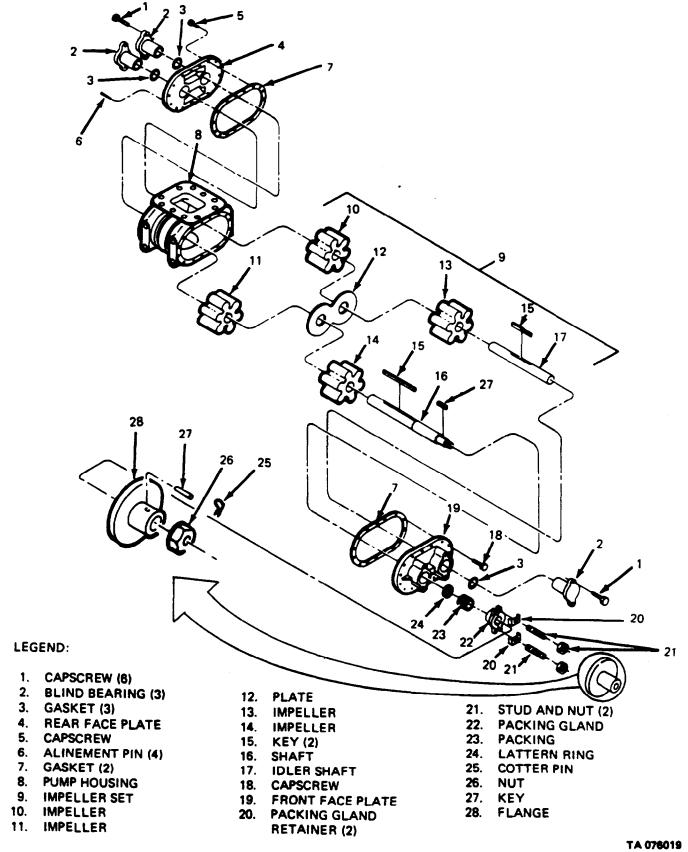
Disassemble/Reassemble Asphalt Pump.
